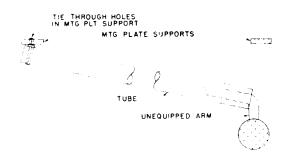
Supporting Unequipped Horizontal Cable Arms in Switchboards and Desks When Mounting Plates Are Omitted
